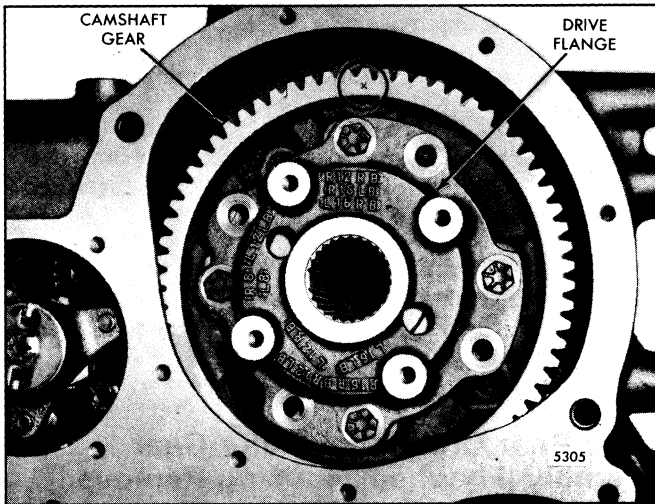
Current Right-Bank Camshaft Drive Flange
